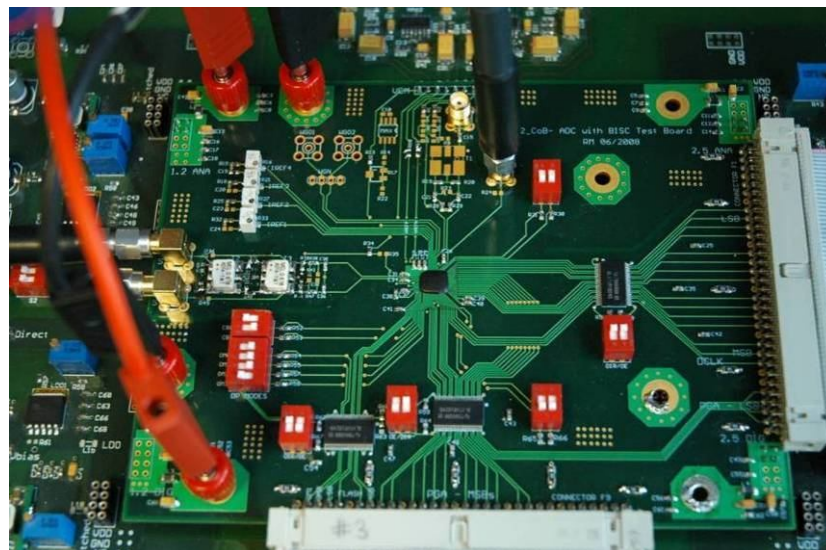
CoB assembly & PCB board for full performance evaluation at S3 Portugal labs.
